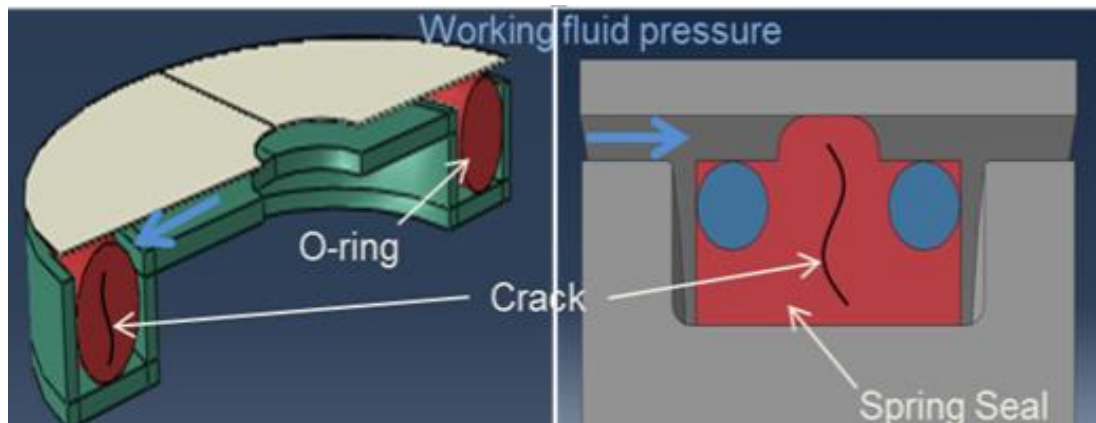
A cross – sectional view of an O-ring and Spring Seal inside their housing gland surfaces; cracks are known to propagate normal to the working fluid pressure direction.
